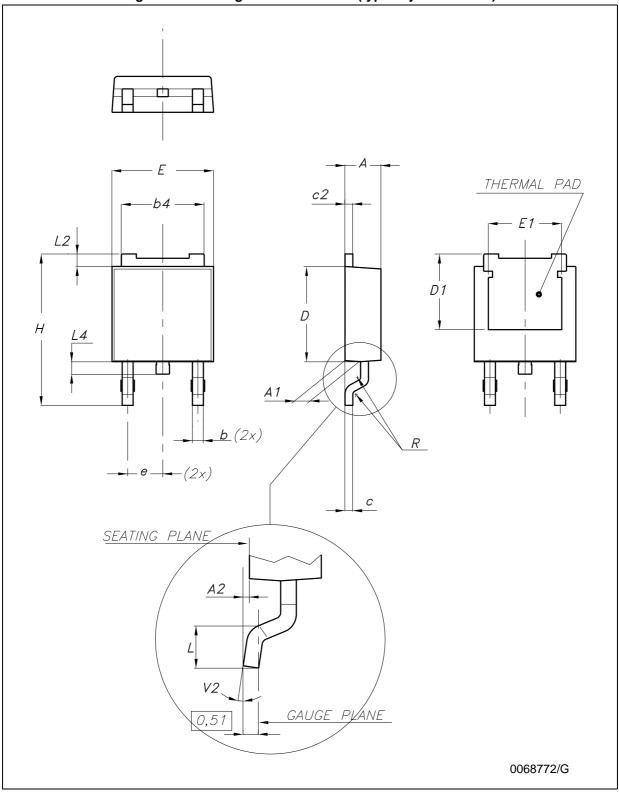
Drawing dimension DPAK (type Fujitsu-subcon.)
